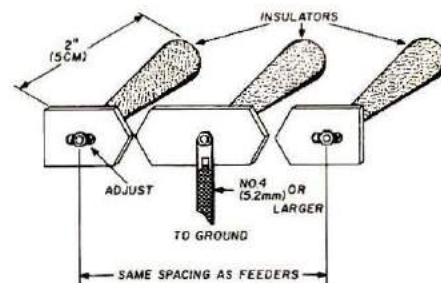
Lightning arrester for parallel-conductor feedlines. It can be made from three feedthrough or standoff insulators and three sections of copper or brass strap material. It should be installed at a point convenient to the antenna tower or main outdoor ground, preferably close to where the feedline enters the station. The spaces between the straps can be adjusted so that arcing doesn't occur in normal transmitter operation. The idea is that lightning discharges will shoot the gap and pass to ground.
